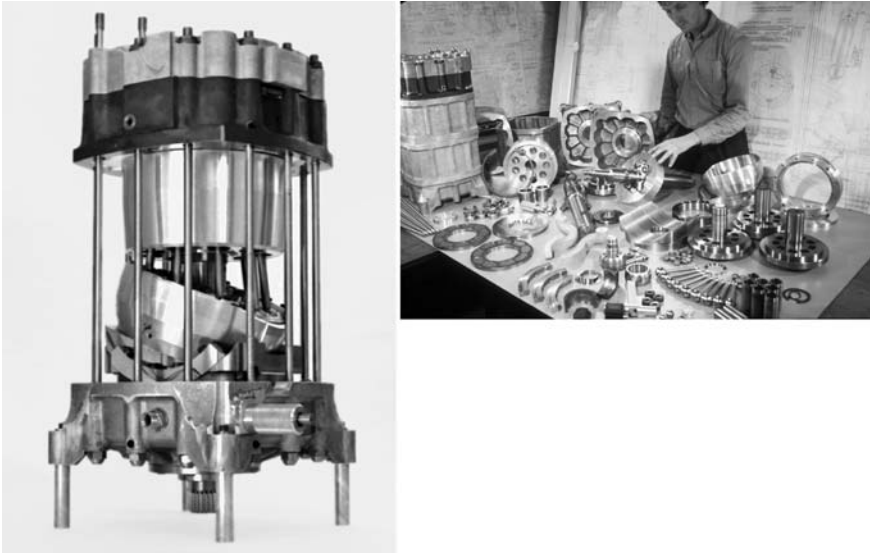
Matthew Rea, in 1985, with parts that he and Carn Gibson made for a 600 kW Clerk high-speed motor. On the left, the motor is shown assembled without its case. The angled swash-plate is clearly visible (Photos: University of Edinburgh)
